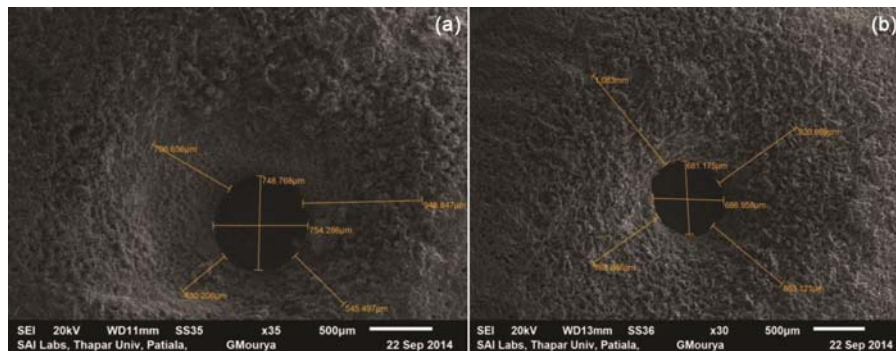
SEM of micro machined hole at lower level of ECMM machining parameter.
